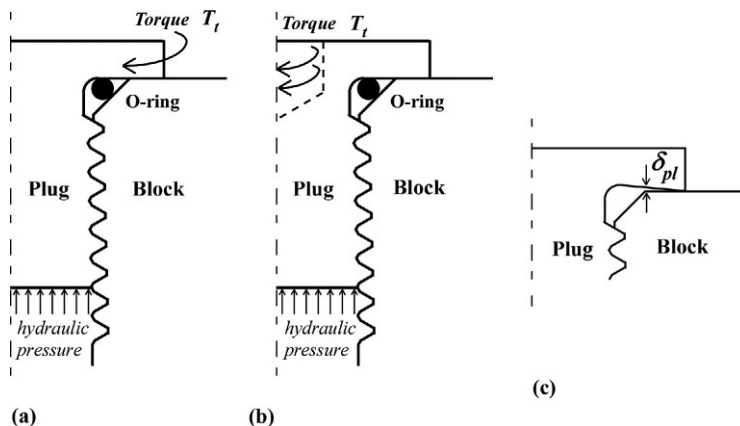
Shape of oil seal plugs. (A) Hexagon head plug, (B) hexagon socket head plug, and (C) geometric error of hexagon head plug.
